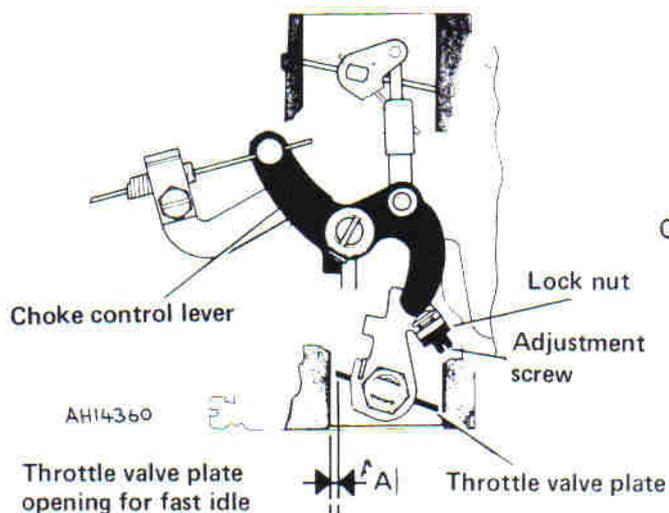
Fast idle setting diagram for IPM 32 MGV carburettor (Sec 11)
